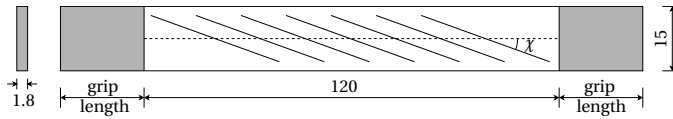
Schematic representation of test coupons used for uniaxial tension experiments; all dimensions are in mm
